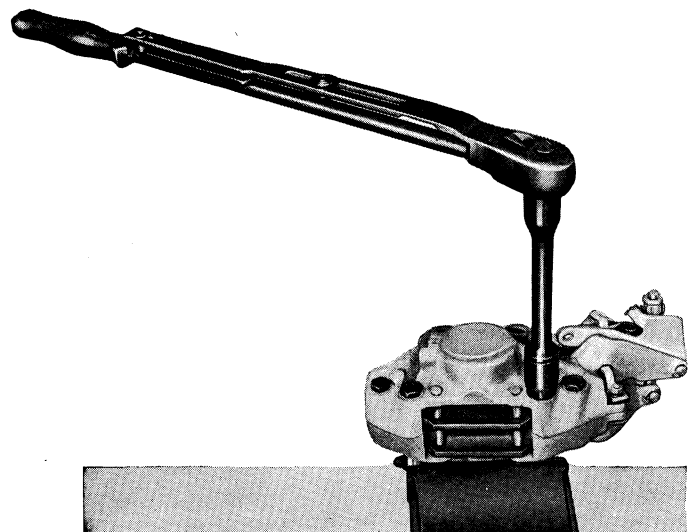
Drawing up caliper half interlocking screws using a torque wrench.
